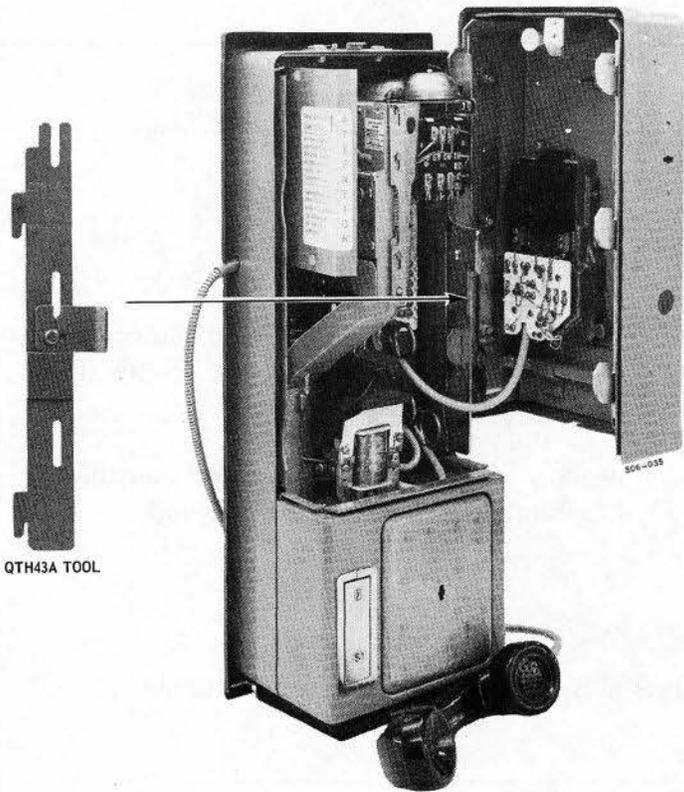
QSD400A1 or QSD2400A1 Coin Telephone Set Showing Cover Unit Assembly Removed and Supported by QTH43A Tool
